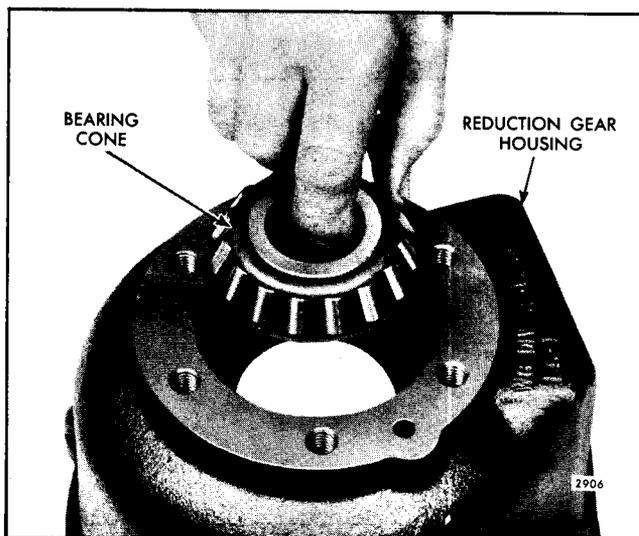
Installing Reduction Gear Drive Shaft Inner Bearing Cone in Gear Housing
